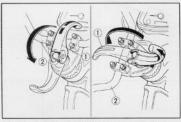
① Handlebar clamp ② Steering handlebar
